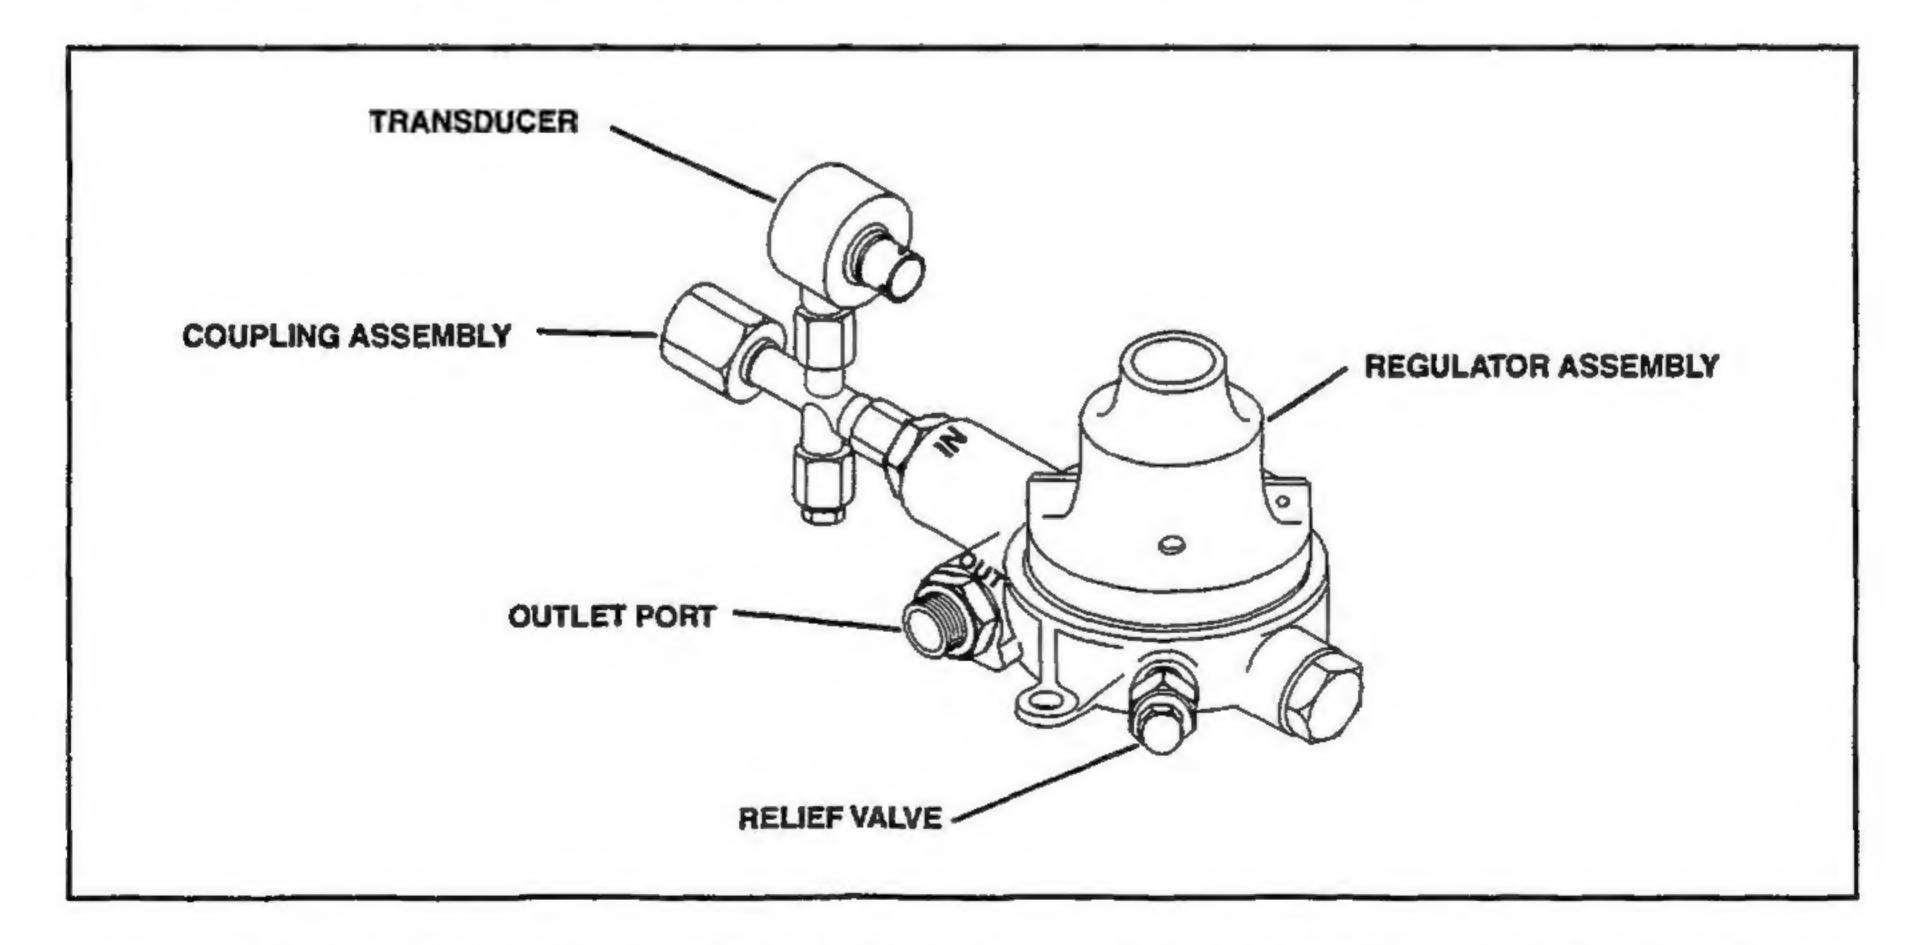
Crew Oxygen System Regulator, Transducer & Coupling Assembly
